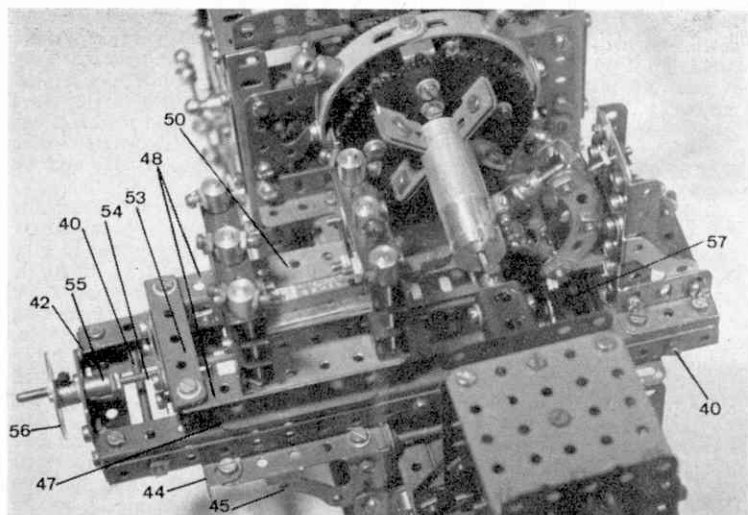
A close-up view of the cross slide with the Lathe set up for operation.
